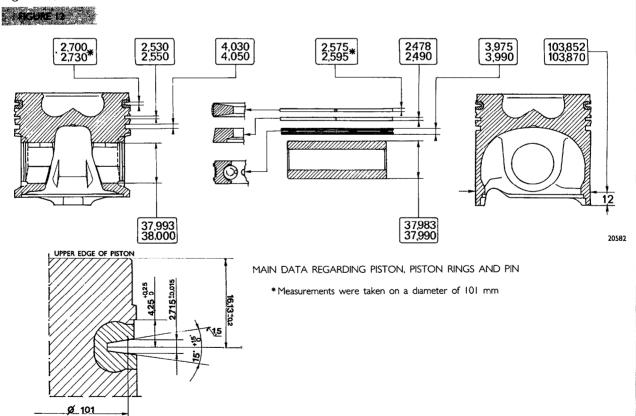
DETAIL OF THE FIRST TAPERED GROOVE FOR THE COMPRESSION RING
